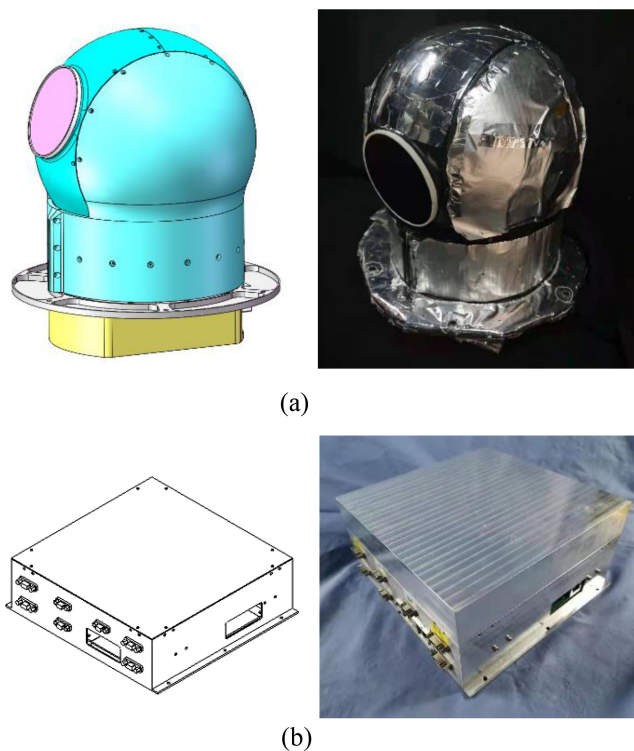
Appearance drawing of mid-wave infrared imager system. The left side is the original design drawing, and the right side is the physical drawing after installation. (a) Appearance drawing of the infrared photoelectric system. (b) Appearance drawing of the control box.
